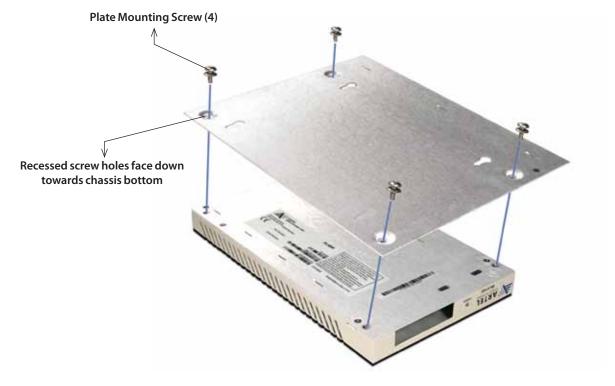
Wall-Mount Chassis Plate: Installing Mounting Screws
